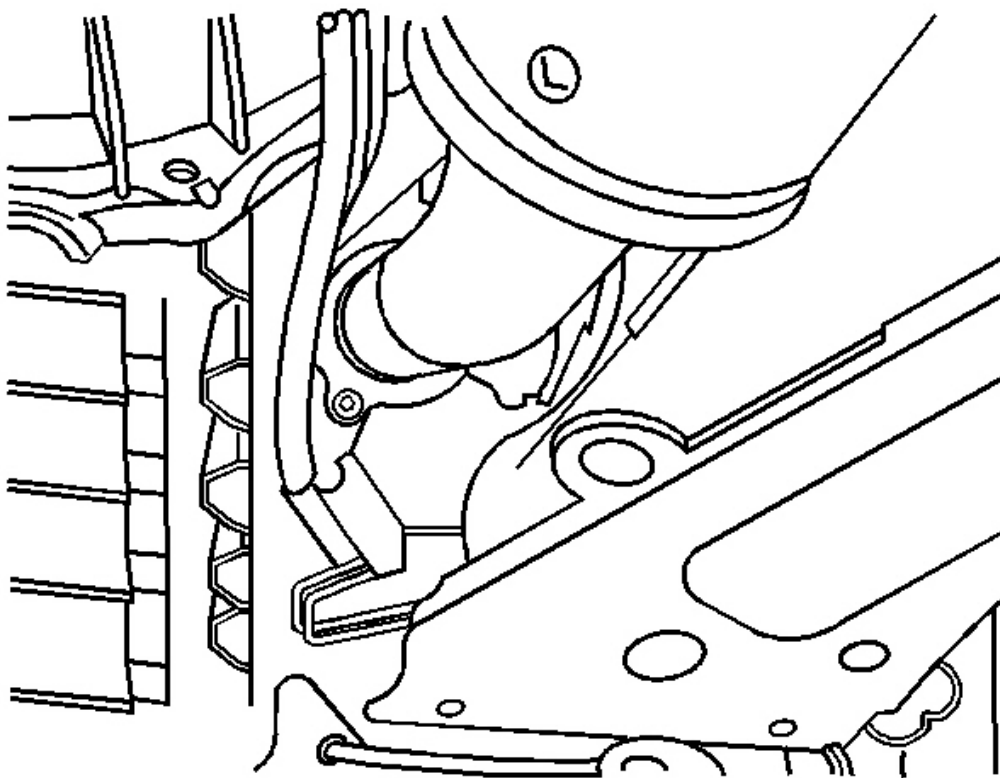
View Of Exhaust Pipe At Exhaust Manifold
